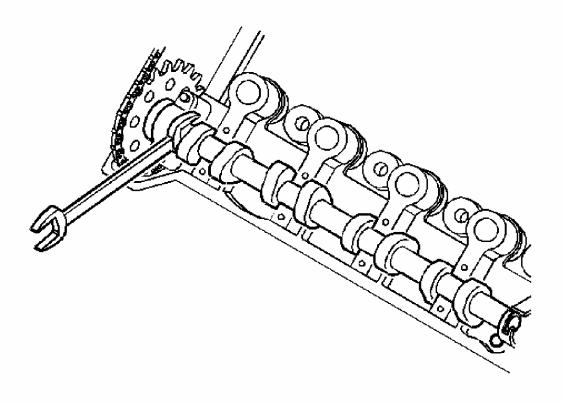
Aligning Sprocket Notch-To-Camshaft Pin Courtesy of GENERAL MOTORS CORP.
